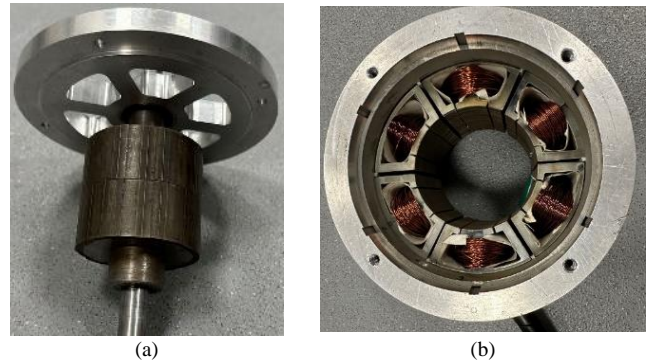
12-slot/10-pole Modular SPM prototype machine. (a) Endcap and rotor, and (b) stator with stator modularity.
